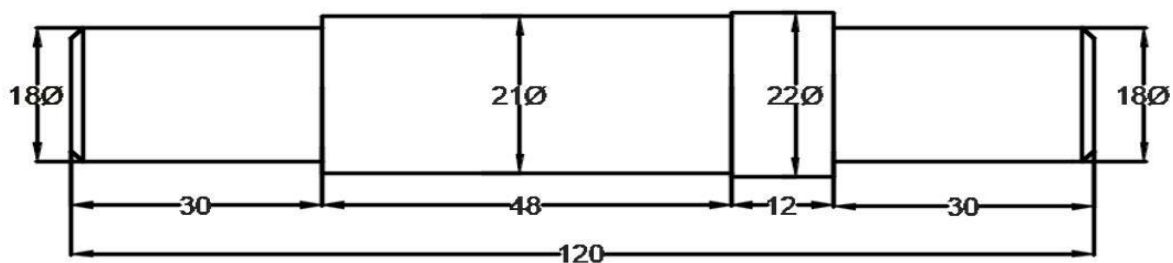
(a): All Dimensions are in mm (Tolerance ± 0.5 mm on lengths; ± 0.1 mm on diameters)
